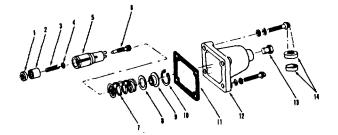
G-52. Standard Governor - Exploded View (Lower Engine)
